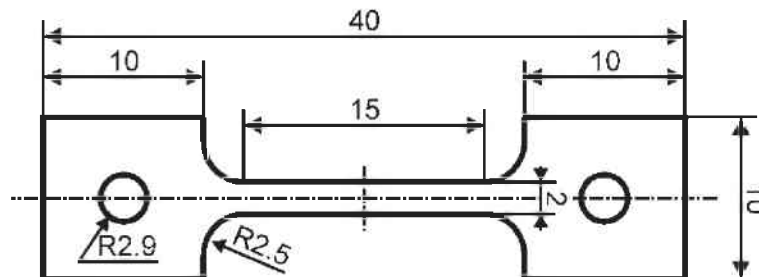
Pin-loaded SENT specimen used for fracture mechanics testing of the hard/soft multilayers
